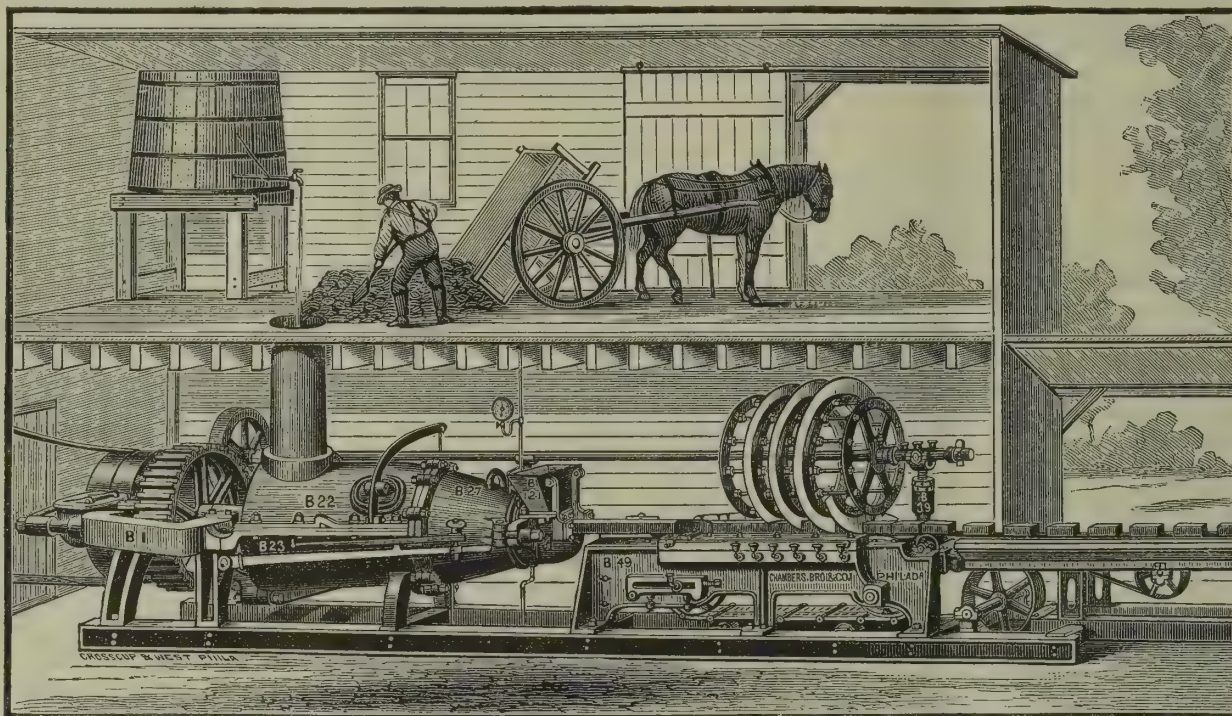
PERSPECTIVE VIEW OF THE CHAMBERS "B" BRICK MACHINE.
